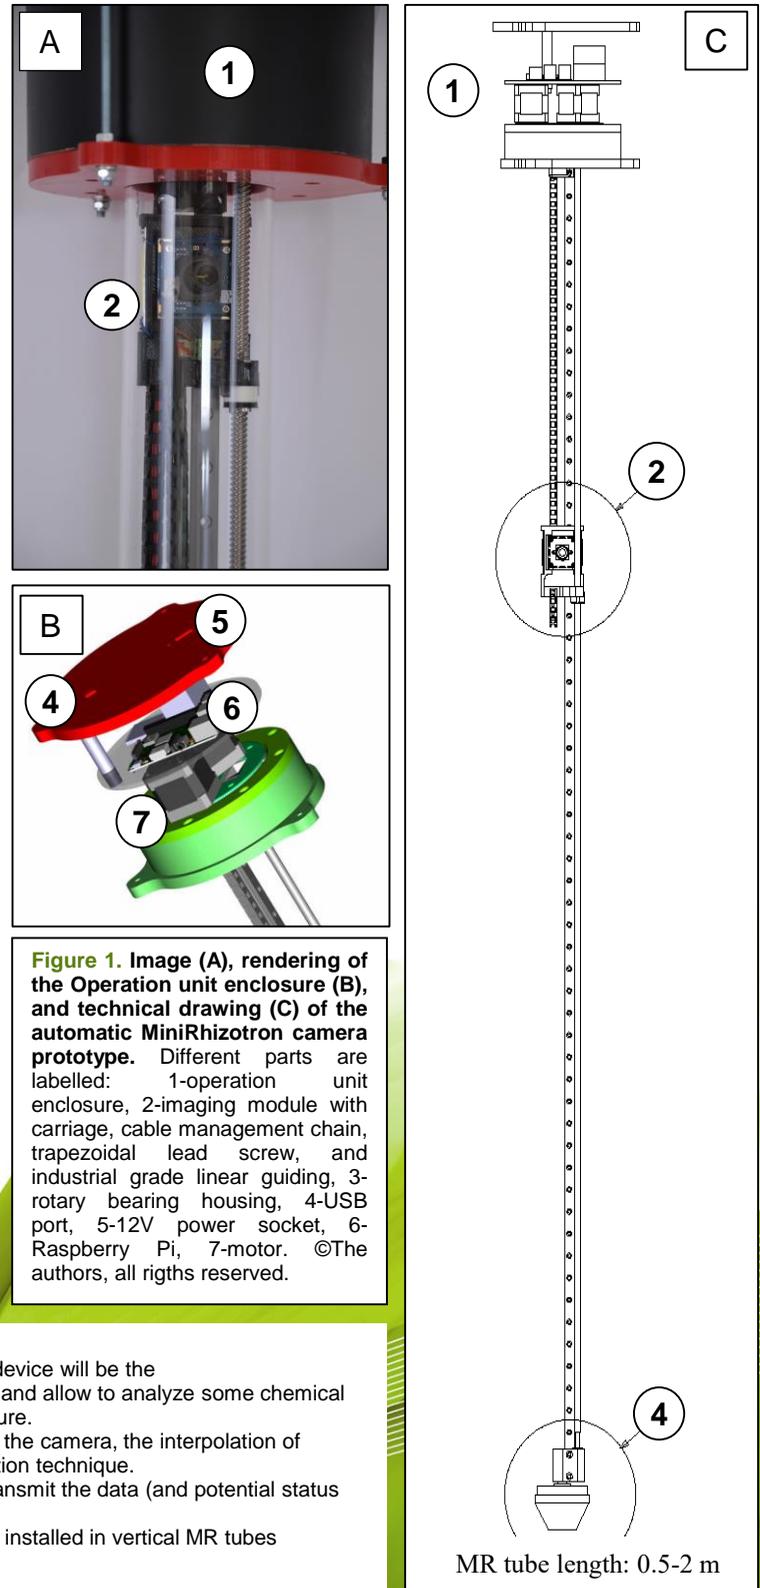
Image (A), rendering of the Operation unit enclosure (B), and technical drawing (C) of the automatic MiniRhizotron camera prototype. Different parts are labelled: 1-operation unit enclosure, 2-imaging module with carriage, cable management chain, trapezoidal lead screw, and industrial grade linear guiding, 3-rotary bearing housing, 4-USB port, 5-12V power socket, 6-Raspberry Pi, 7-motor. ©The authors, all rights reserved.
